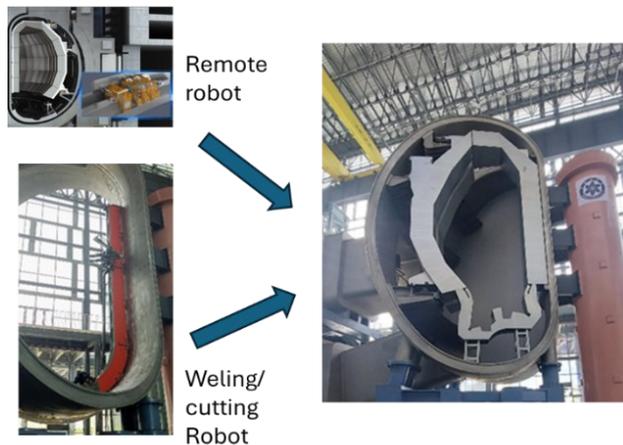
Welding/cutting machine and mobile robot and control algorithm for CFETR maintenance.
